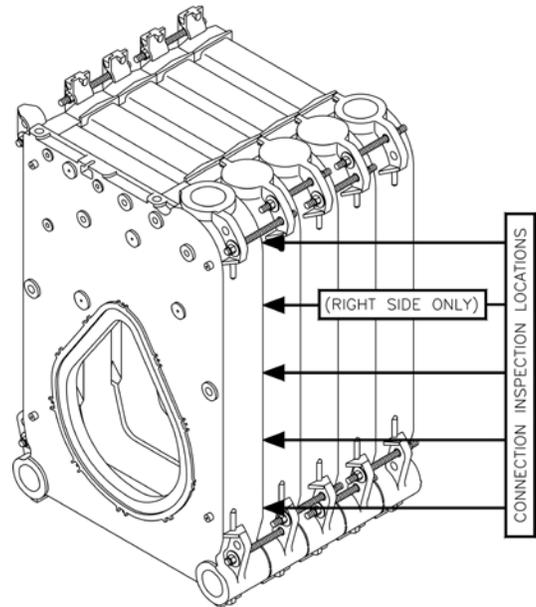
Connection Inspection Locations and Manual Draw-Up Tie Rod Pattern
